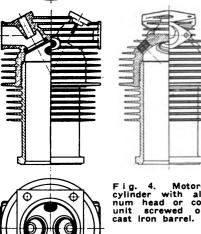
Motorcycle cylinder with aluminum head or cooling unit screwed onto cast iron barrel.
